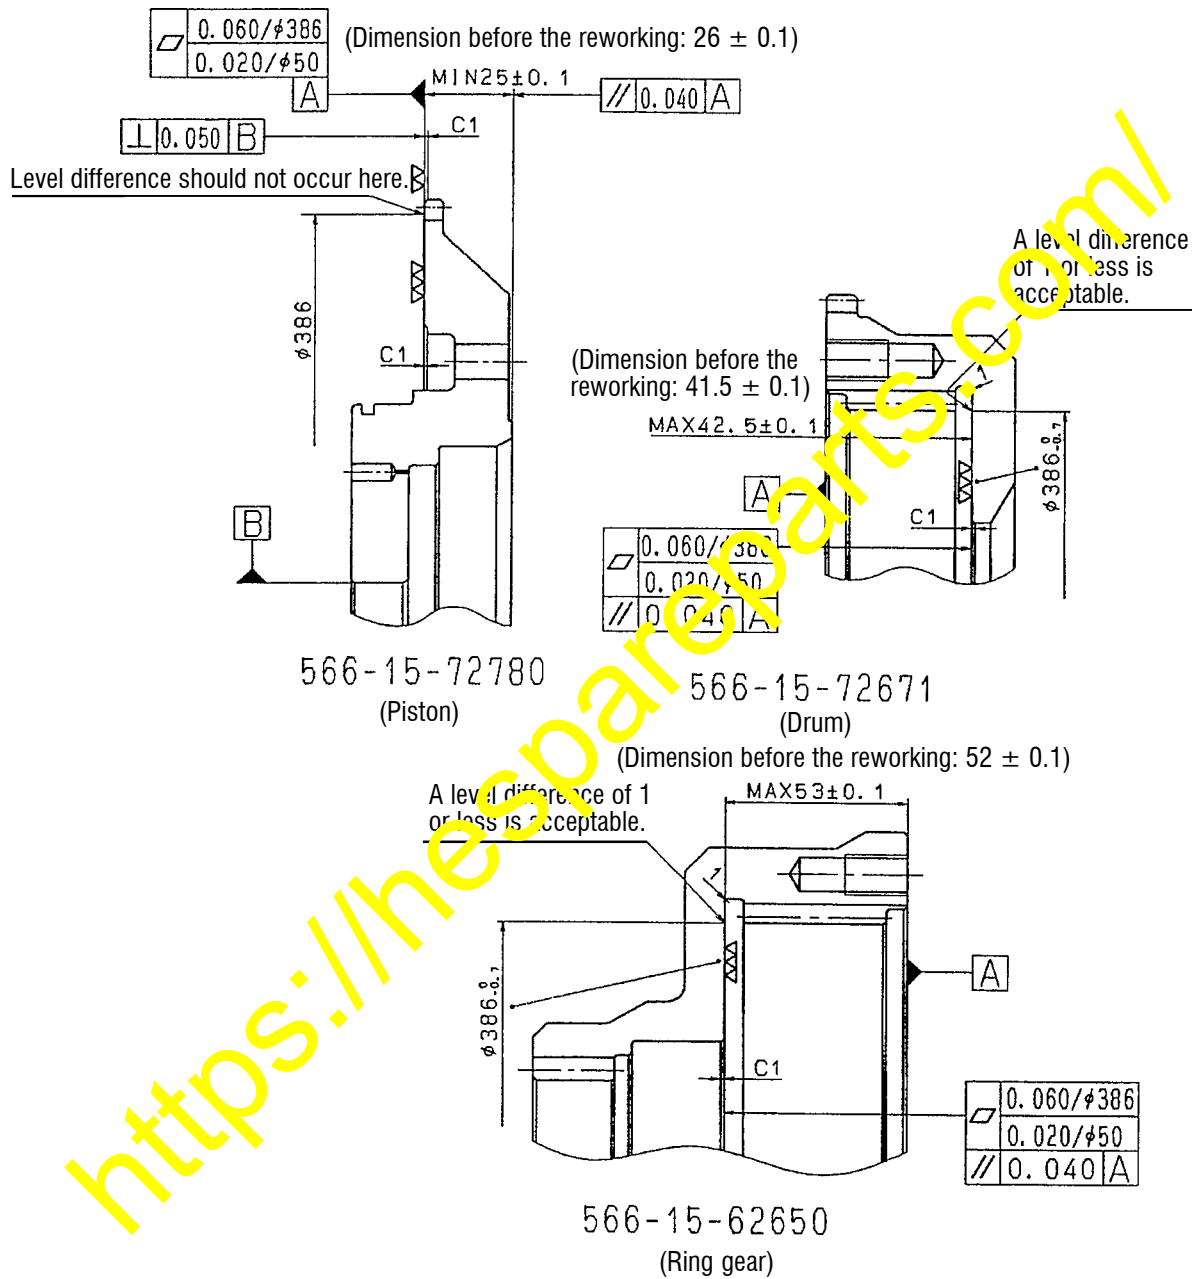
Detailed reworking drawing for the ring gear, piston and drum
